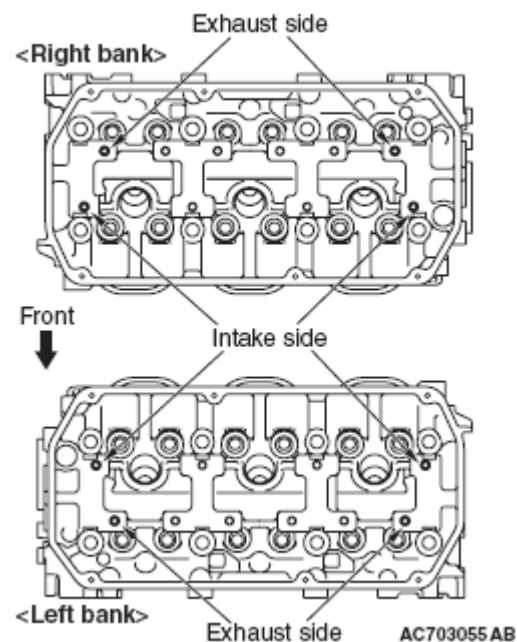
Identifying Installation Position Of Special Tool MD998772 - Exhaust Side And Intake Side
